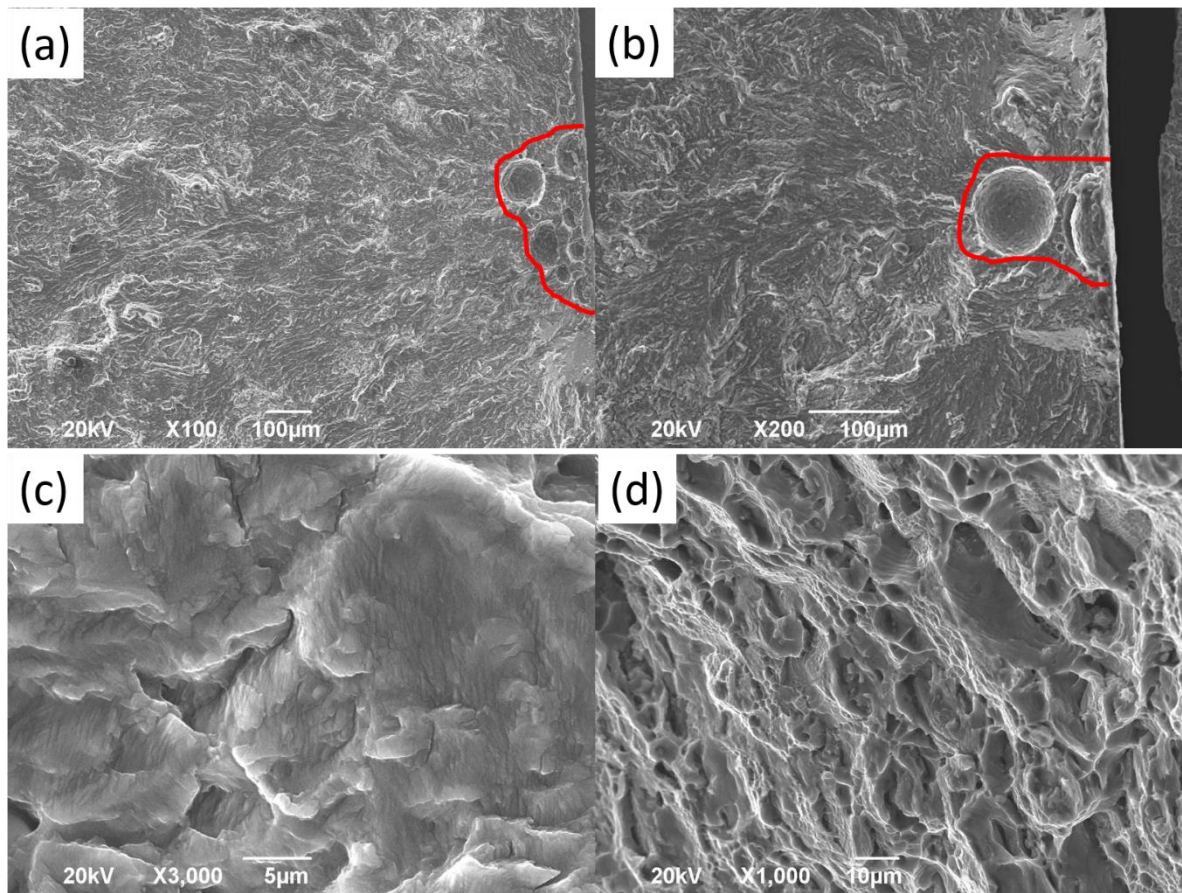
Fatigue fracture of ER5356 joint, (a)~(b) crack initiation from pores, (c) striation during the propagation period, (d) fracture period.
